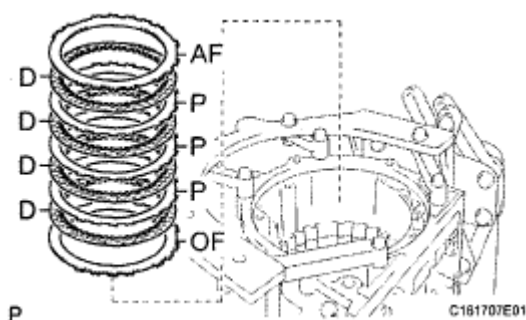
Identifying "O" Mark Flange, Discs, Plates And "A" Mark Flange To Transmission Case
